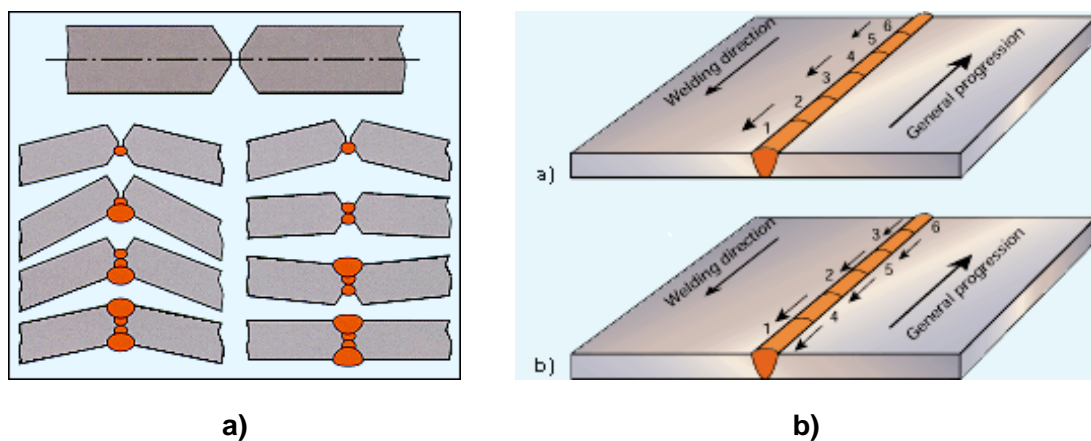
Weld sequencing to a) balance welding around the neutral axis of the joint and b) to minimise heat input [8]
